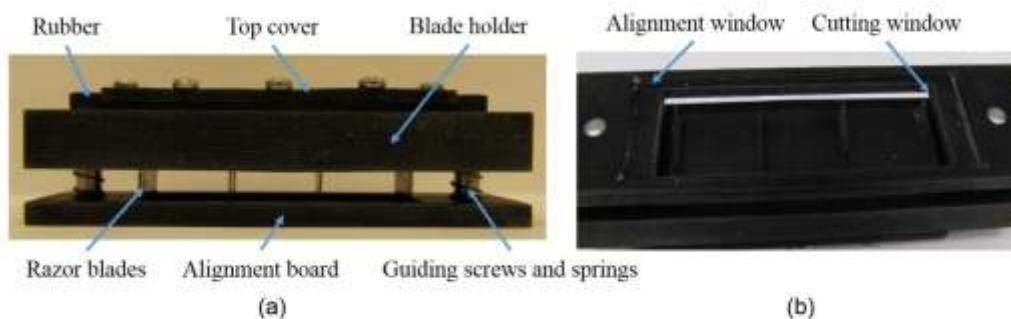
Sample cutting fixture: (a) front view of the fixture; (b) bottom view of the fixture
